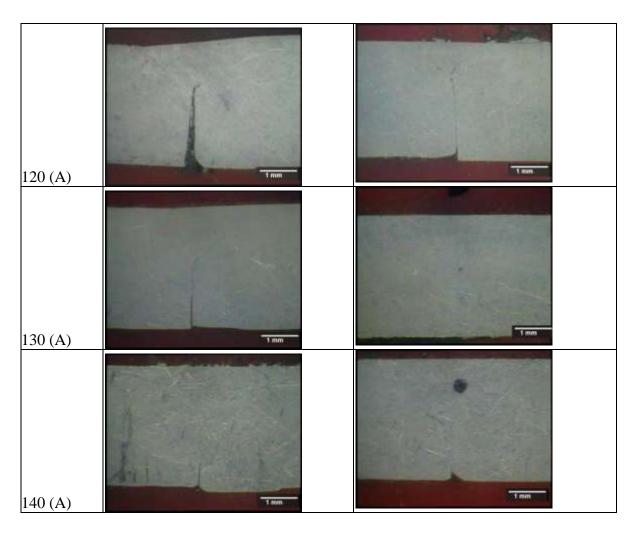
Optical microscopy photograph at the cross section of the welding done with different current setting and welding speed
